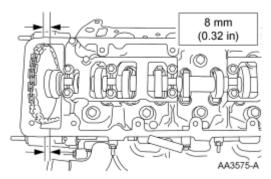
Applying Sealant At Engine Front Cover/Cylinder Head Surface Courtesy of FORD MOTOR CO.
